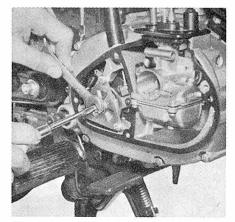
When adjusting clutch, loosen adjuster screw 1/4-turn from point of resistance.
